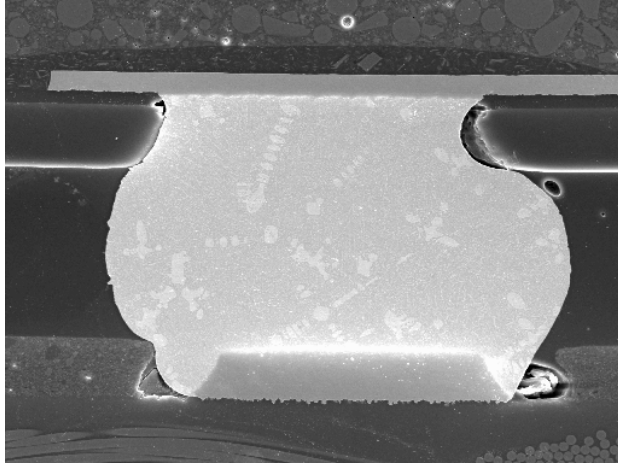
Cross Section of Solder Joint Showing Excellent Wetting with Soak Profile.
